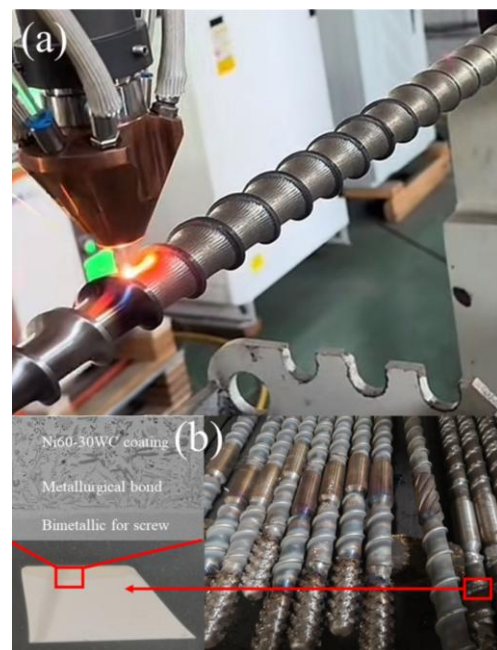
Photograph of the surfacing welding equipment for screw surface coating (a), and microstructure image of the polished cross-section of the coated screw (b)
